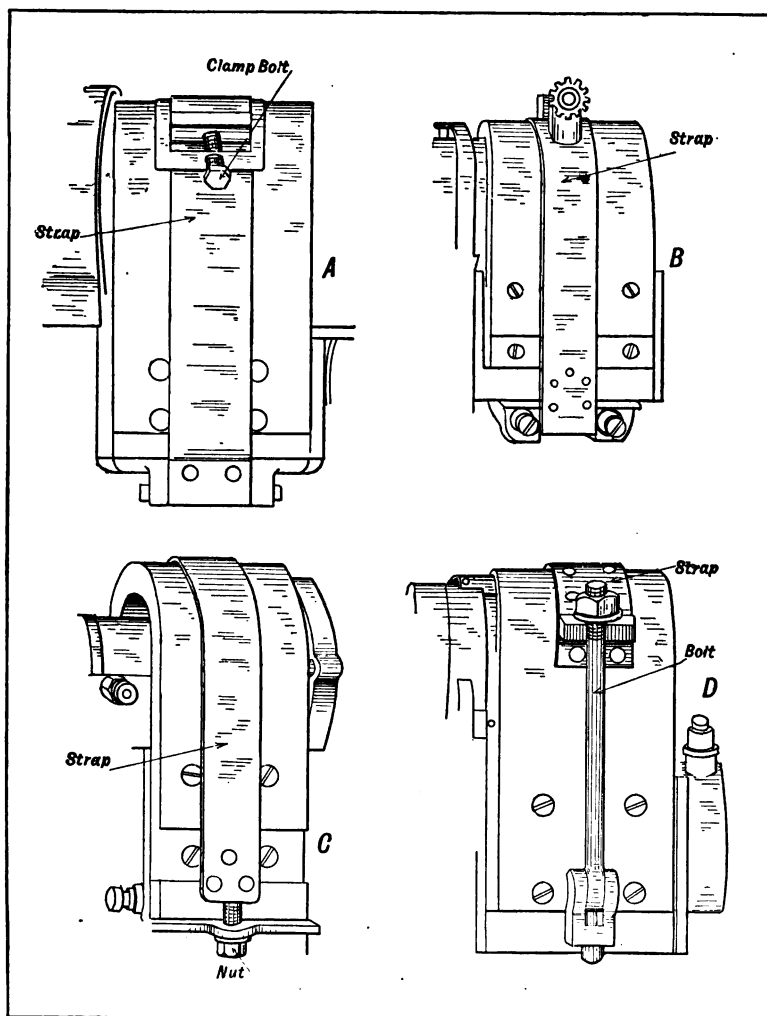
Simple Methods of Holding Magnetos in Place on Engine Base to Permit of Easy Removal of Apparatus when Desired.
